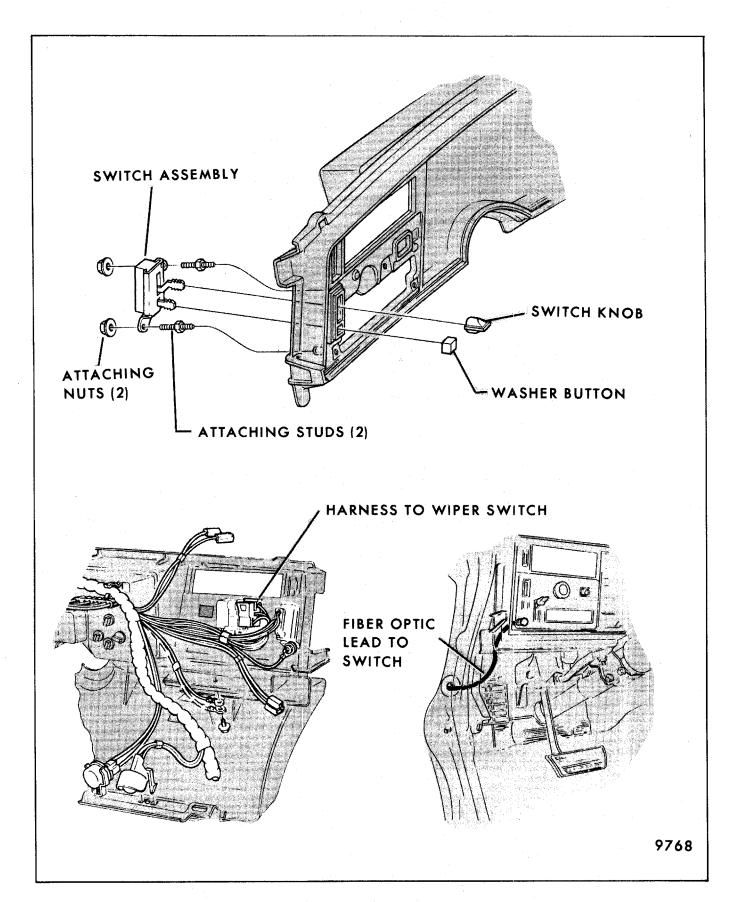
Windshield Wiper Switch Installation Oldsmobile E Styles
